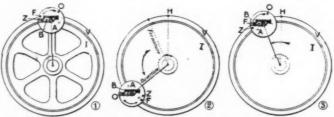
Larrad apparatus mounted between the cone and flywheel.
